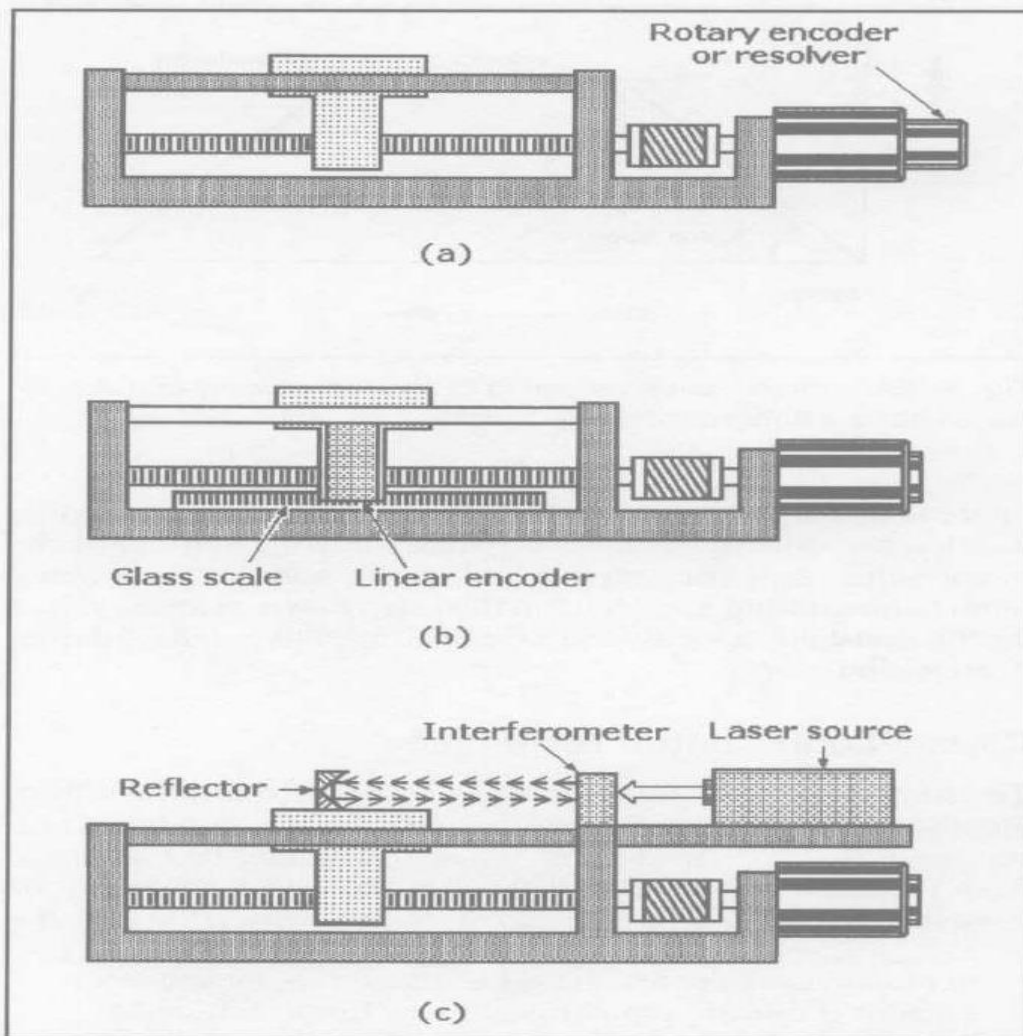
Examples of position feedback sensors installed on a ballscrew-driven slide mechanism: (a) rotary encoder, (b) linear encoder, and (c) laser interferometer.
